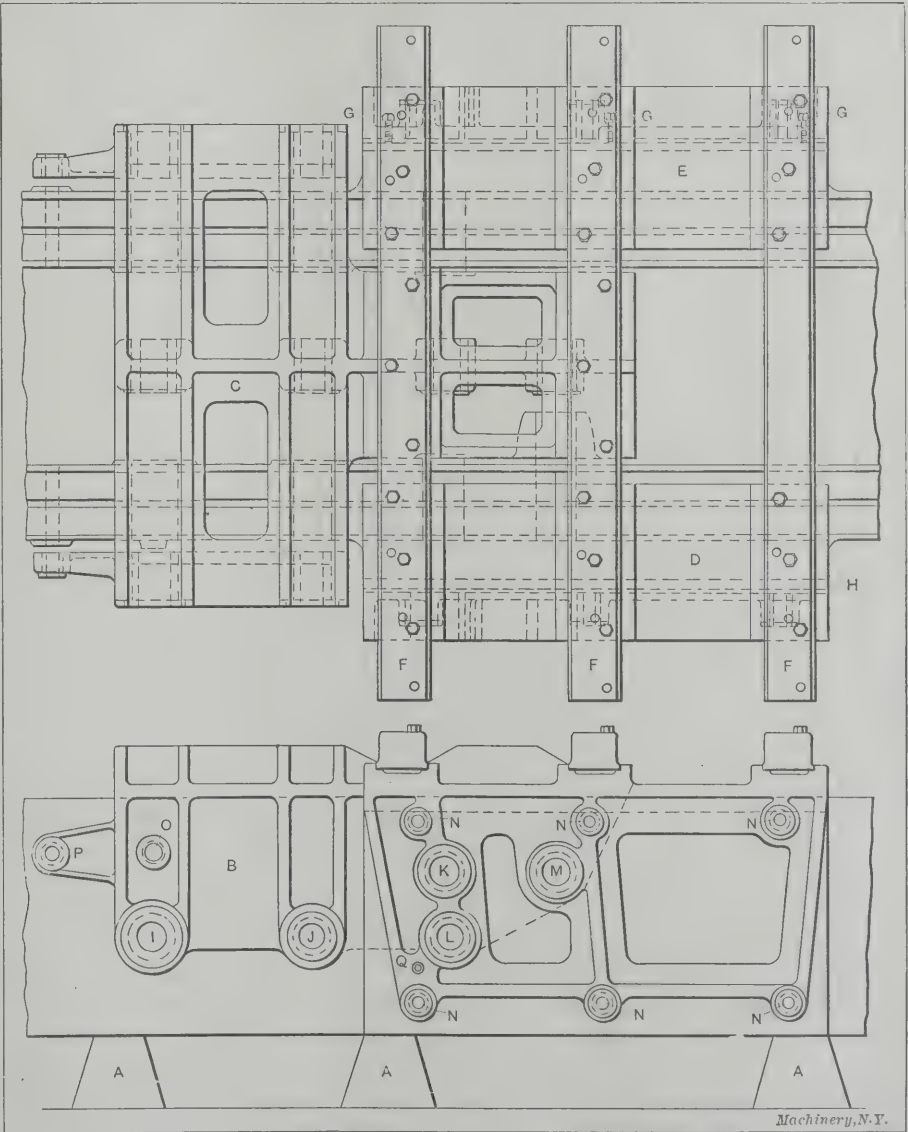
Combination Boring and Drilling Jig in Position on the Bed
